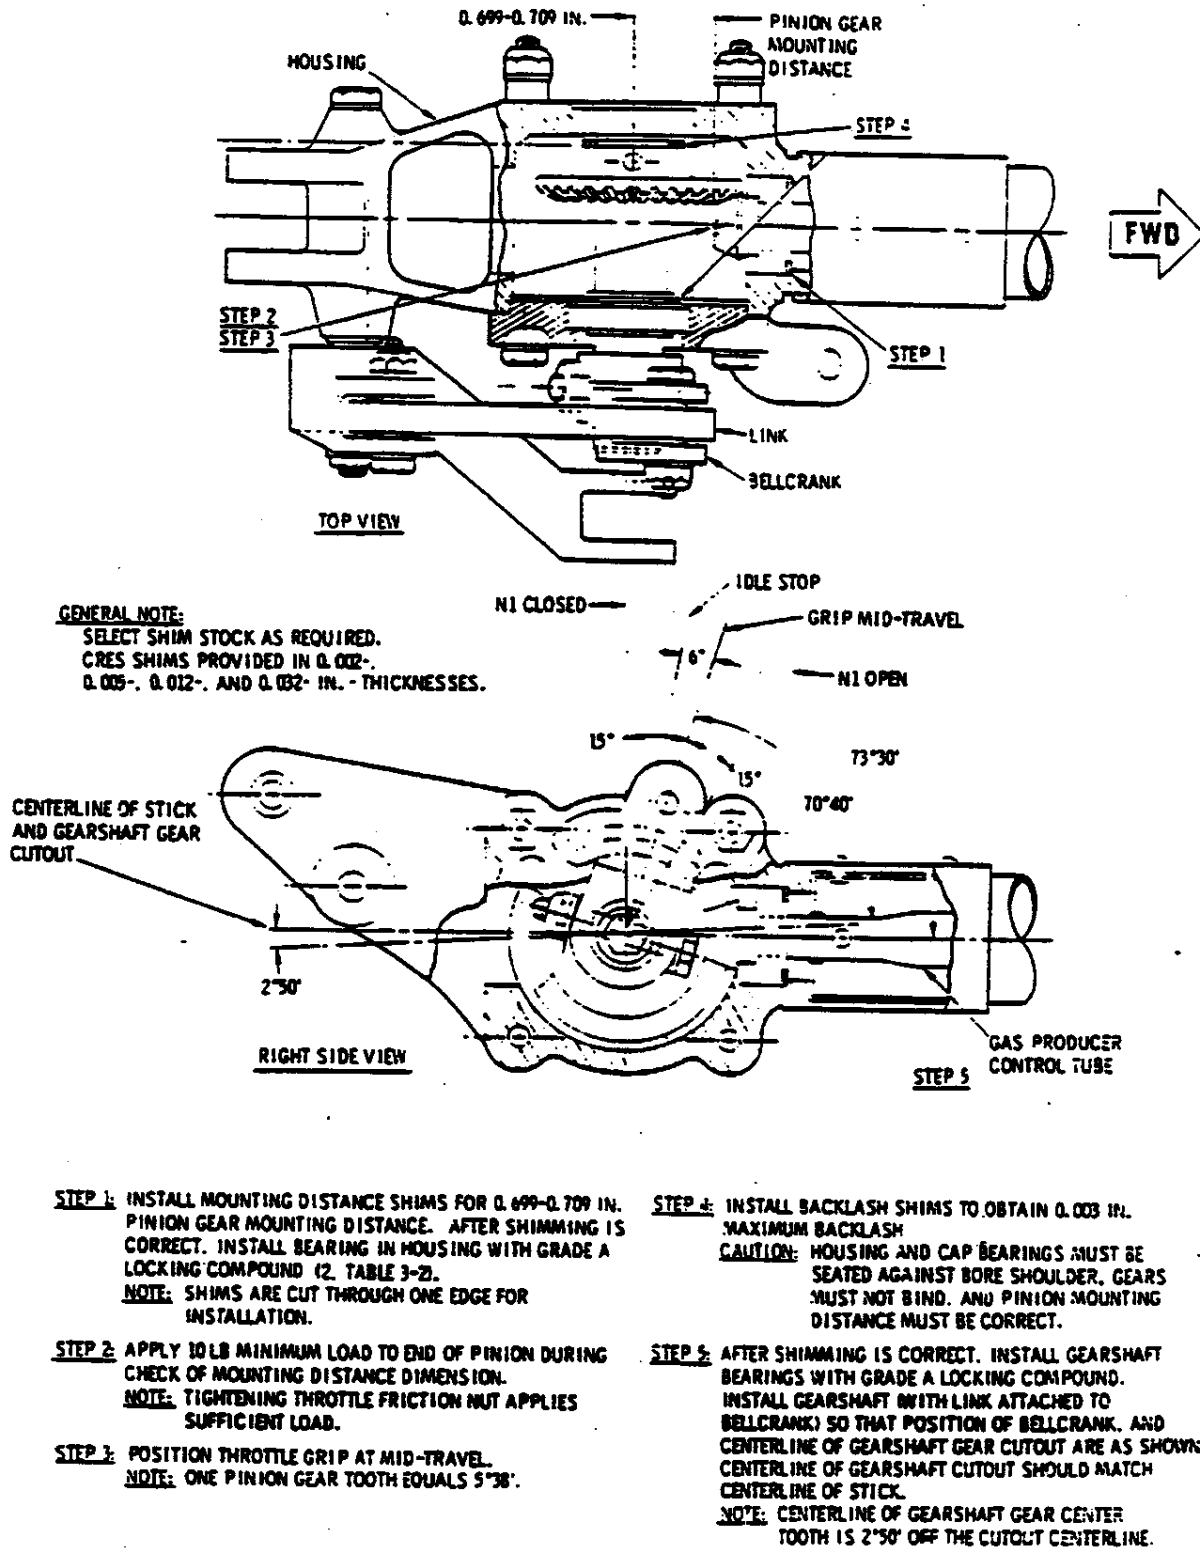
Adjustment of Gas Producer Drive Mounting Distance and Backlash - Copilot's Collective Stick
